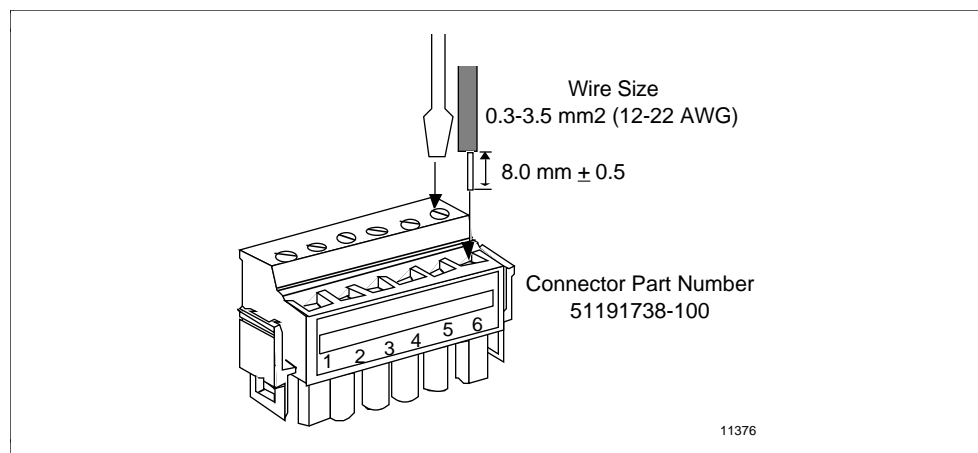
Galvanic Isolation Module Crimp Pin-Type Terminal Connector
